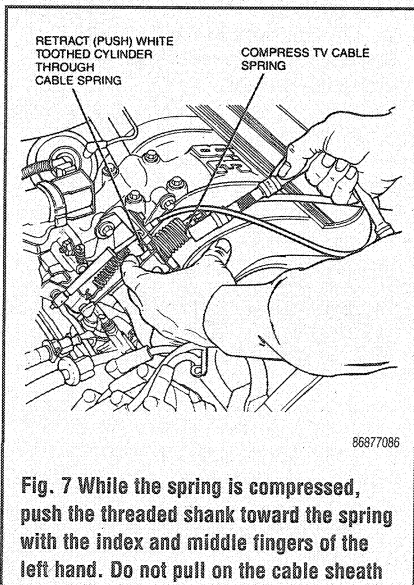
While the spring is compressed, push the threaded shank toward the spring with the index and middle fingers of the left hand. Do not pull on the cable sheath
